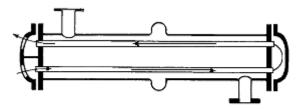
Sketch of a Fixed Tube Sheet Design Incorporating an Expansion Joint. (COURTESY OF PATTERSON-KELLEY CO.)
